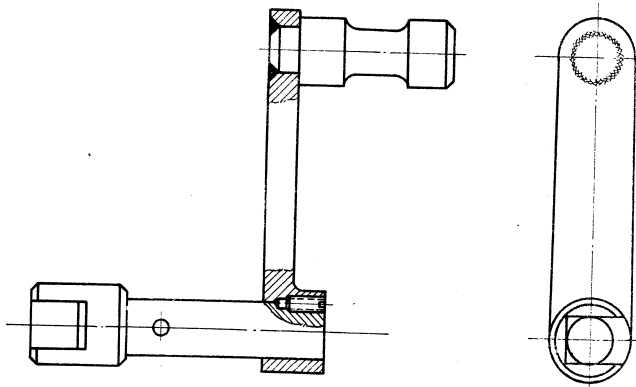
AUXILIARY TRIGGER ASSEMBLY
